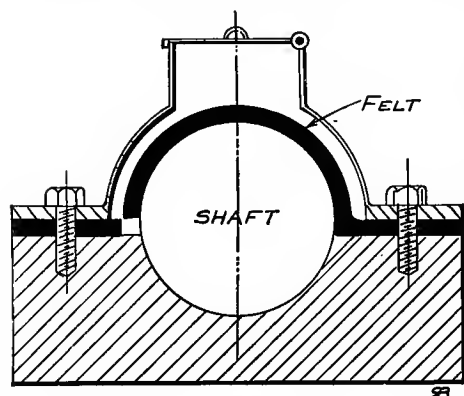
Method of applying oil lubrication to a semi-enclosed bearing.
